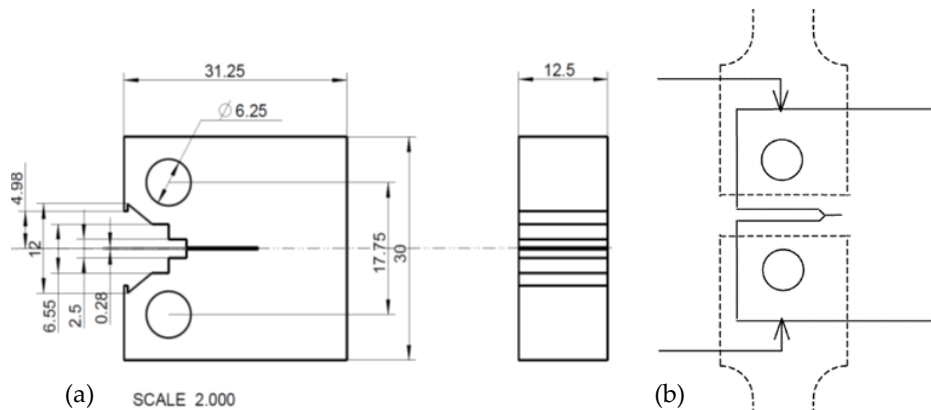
(a) schematic drawing of CT-specimen with PD and (b) drawing of the CT-specimen that have been used.
